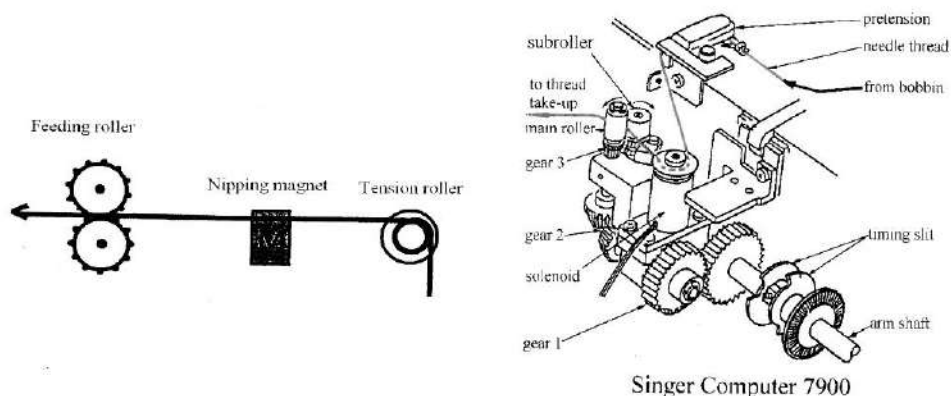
A Thread Feeding Apparatus for Lock-stitch Sewing Machine
